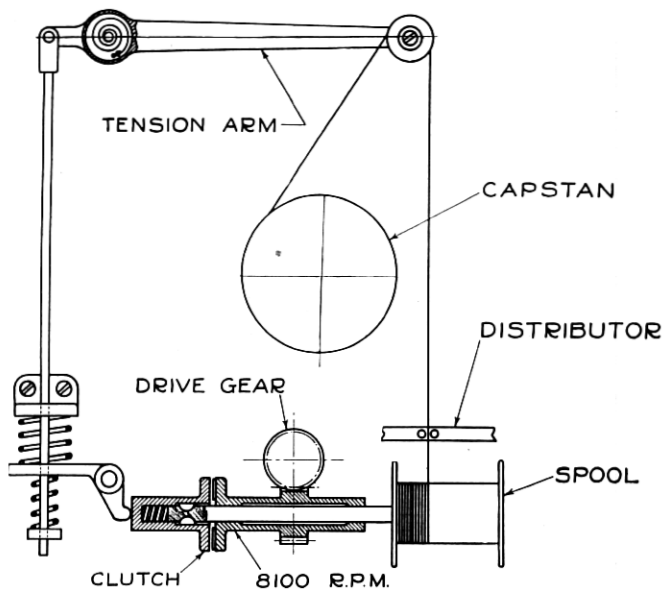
Automatic tension mechanism—No. 3 wire drawing machine
